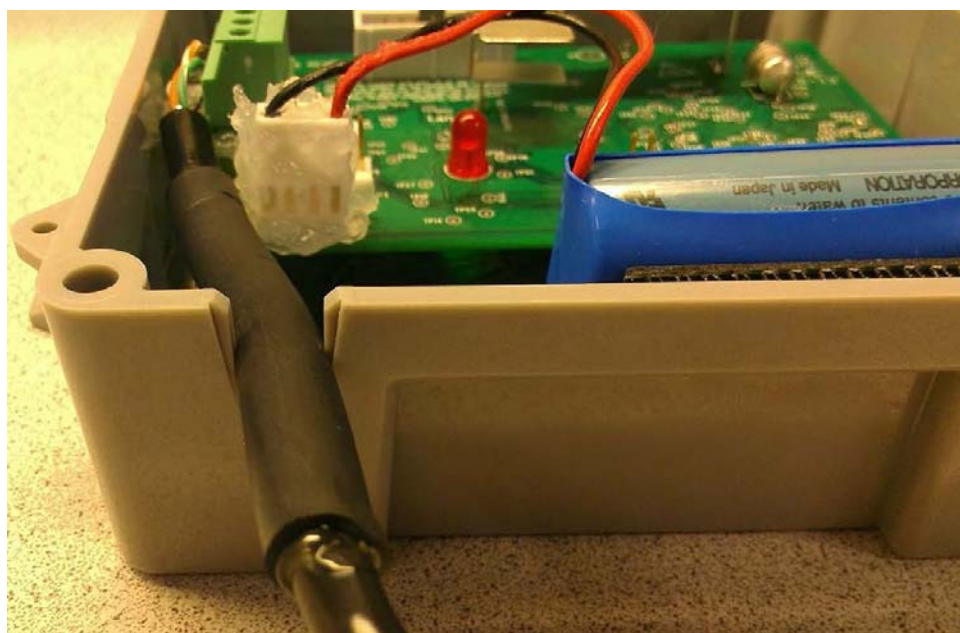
9. Heat Shrink Tubing Midpoint Pressed Into Strain Relief Slot
